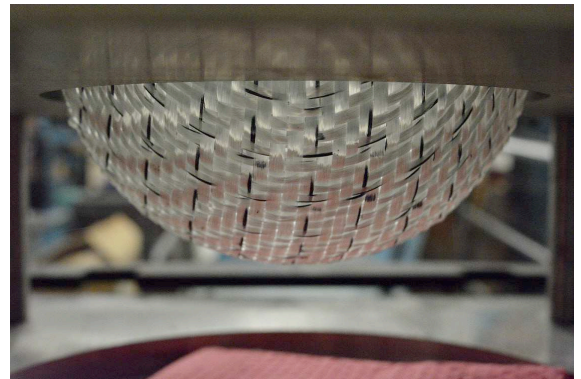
Forming experiment, hemispherical punch on glass fabric
